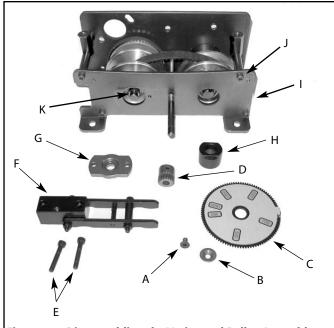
Disassembling the Vari-speed Pulley Assembly
